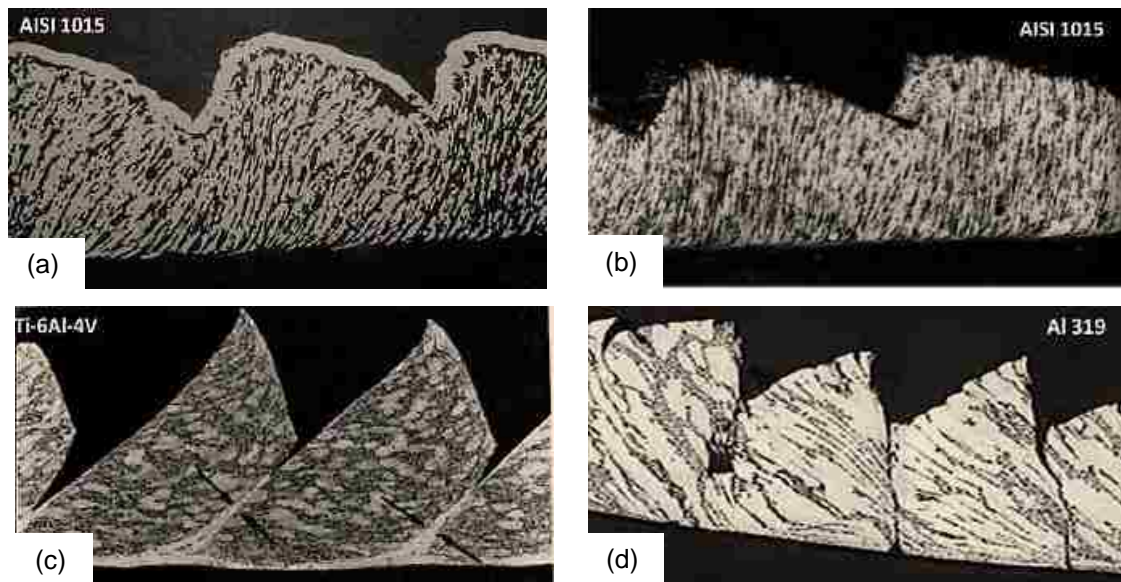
Types of cyclic chip segments (a) wavy chips formed during machining AISI 1015 at a cutting speed of 30 m/min and feed rate of 0.13 mm/rev, (b) segmented chips formed during machining of AISI 1015 at a cutting speed of 50 m/min and feed rate of 0.20 mm/rev, (c) catastrophic shear chips formed during machining of Ti-6Al-4V at a cutting speed of 5 m/s and feed rate of 0.12 mm/rev, (d) discontinuous chips formed during machining of 319Al at a cutting speed of 35 m/min and feed rate 0.25 mm/rev [14, 15]
